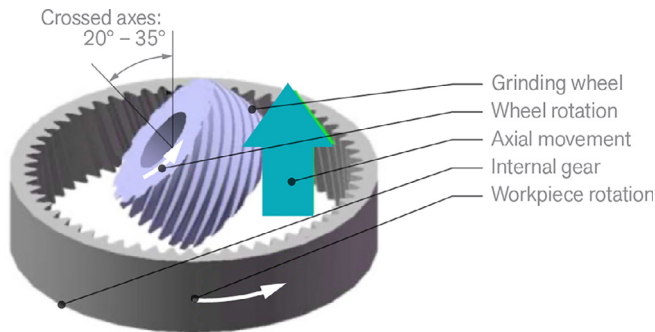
Continuous generating grinding of internal gears with barrel-shaped grinding wheels (Mitsubishi Heavy Industries, Ltd., Japan).
